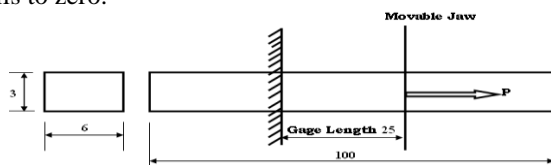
Tensile test specimen geometry as per ASTM C1275 standards Fig.8 Tensile test specimens
